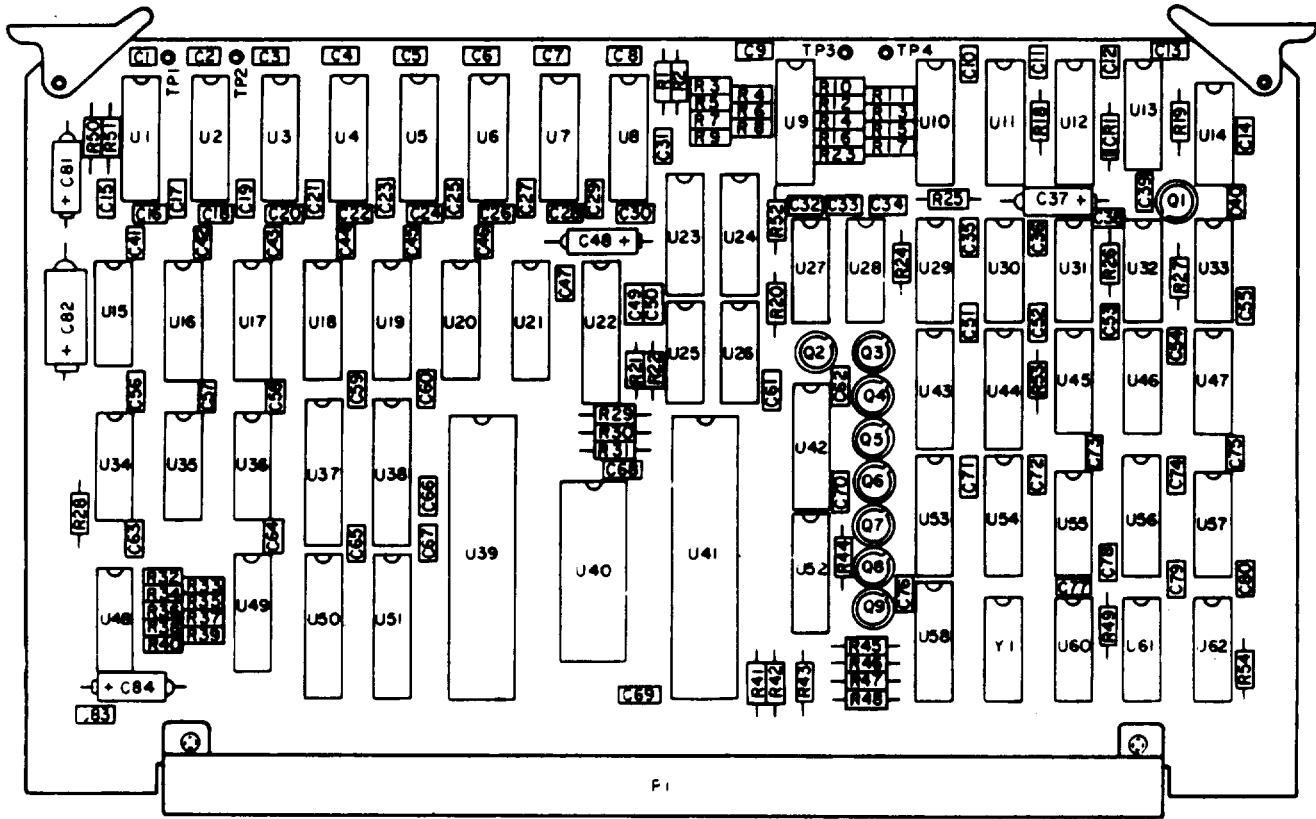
CPU CIRCUIT CARD ASSEMBLY.
